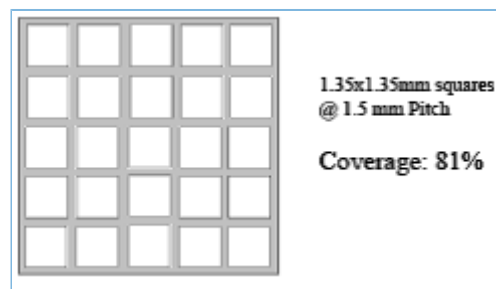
Exposed/Ground pad stencil design recommendation for QFN packages
